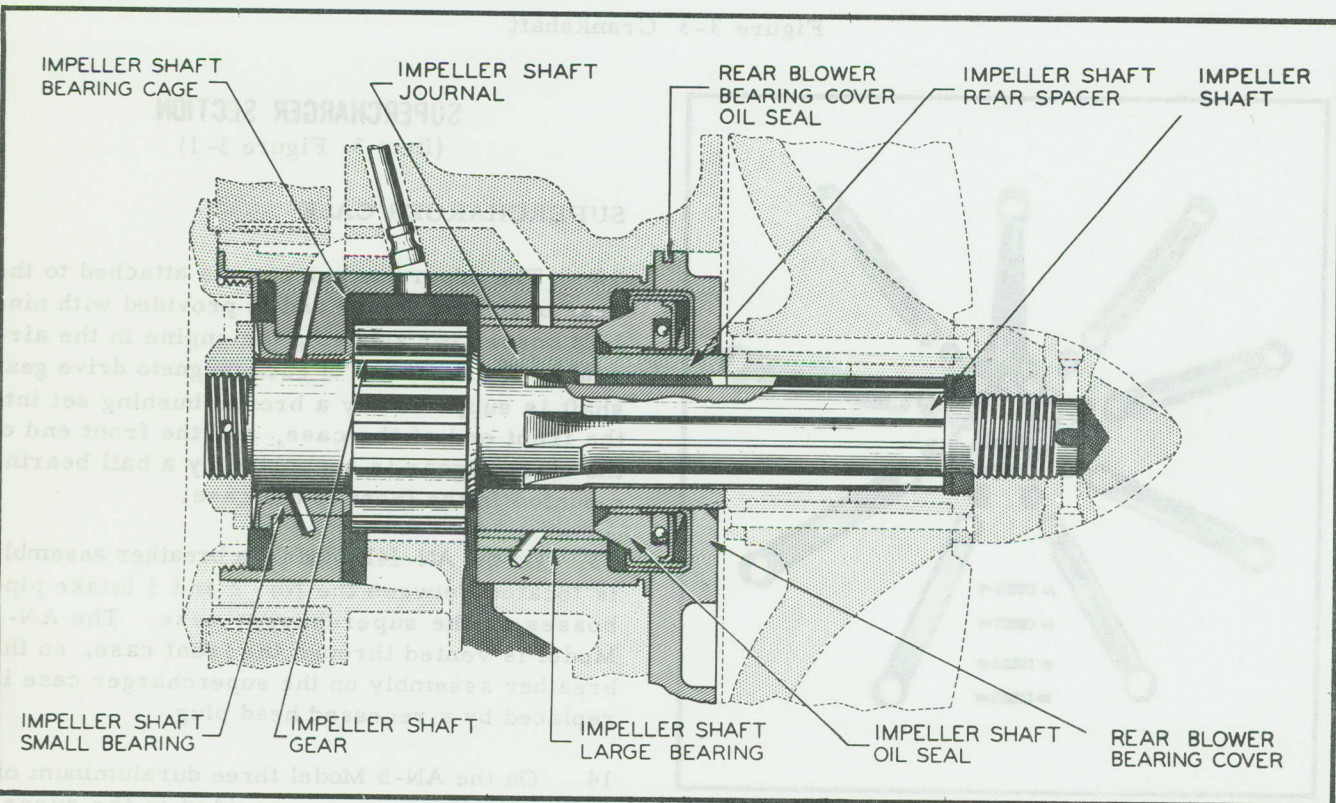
Cut-a-way of Supercharger Case at Impeller Shaft AN-5 Model
